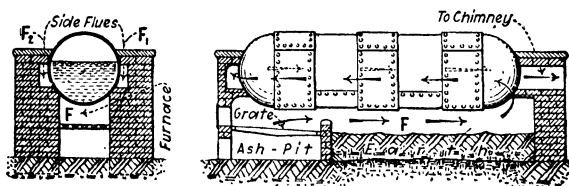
The egg-end or cylinder boiler (year 1790).
